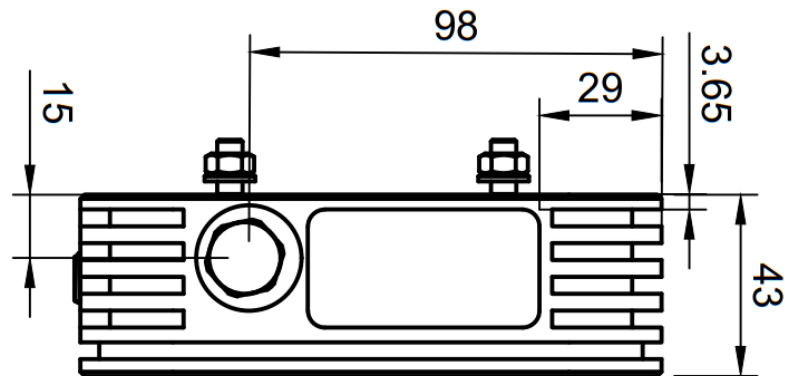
KY-LOC 1D.02.01 Mechanical Drawing (Left Side View)
